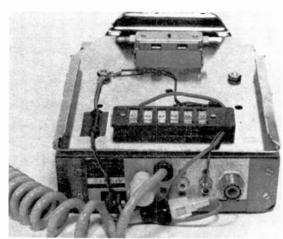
RELIABLE CONNECTIONS are attained by unsoldering the wires supplied with the slide mount and soldering the wires from the transceiver directly to the terminals on the slide mount.
